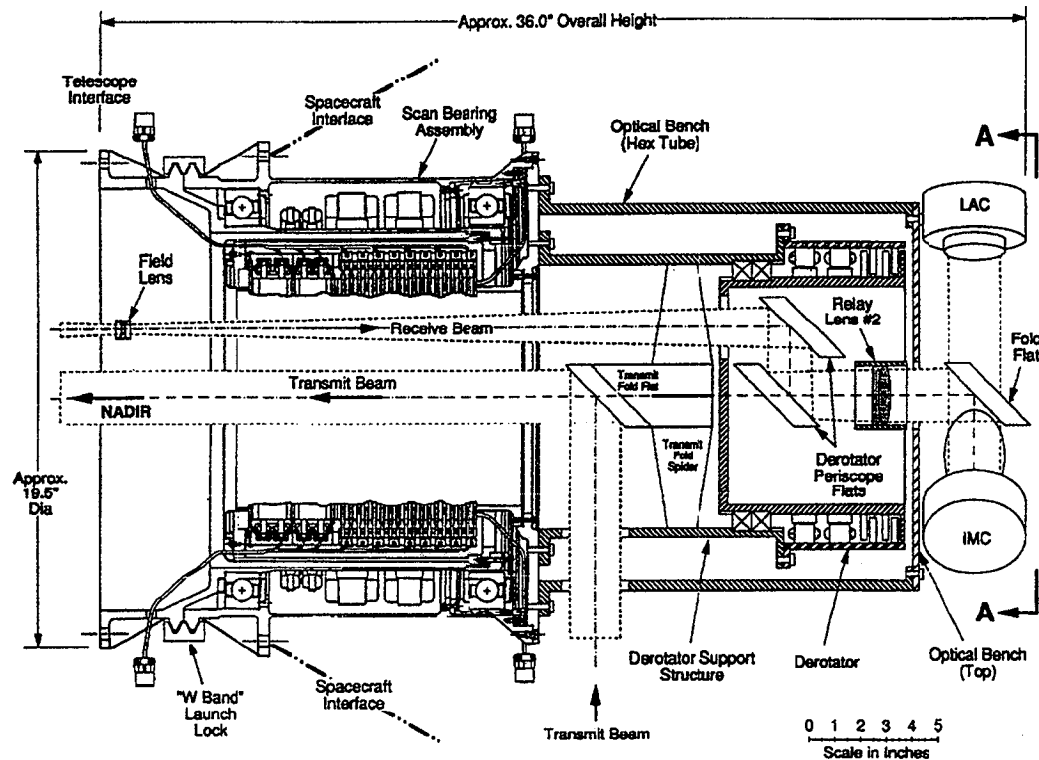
Scan Bearing/Derotator/Optical Bench Assembly Configuration.
